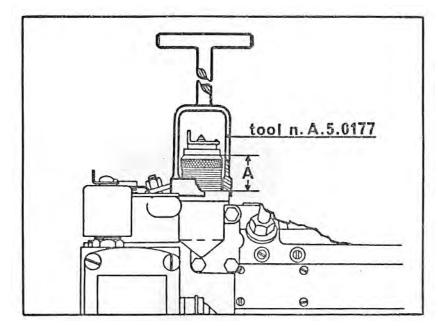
FUEL CUT-OFF SOLENOID REMOVAL AND SETTING
